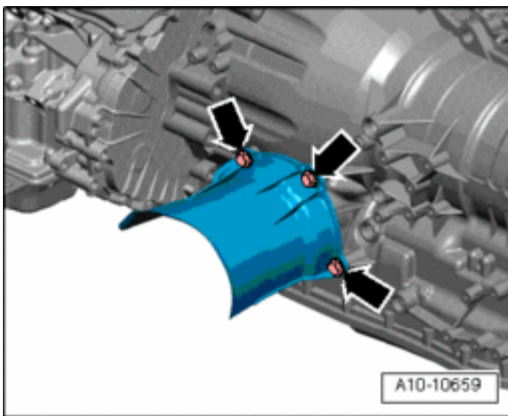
Removing Left Drive Shaft Heat Shield From Transmission
